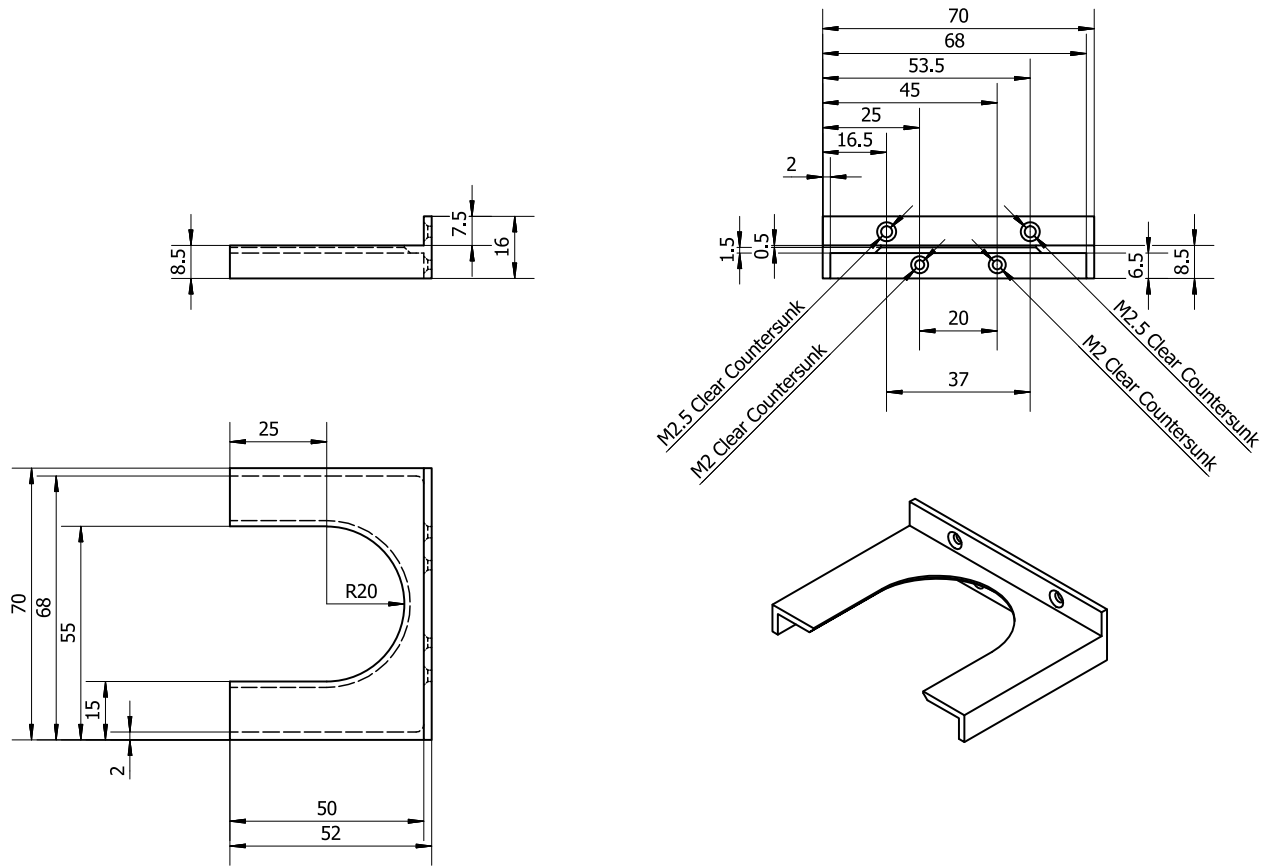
Technical drawing of the slide holder mount for the piezoelectric stepper stage. Material: invar.
